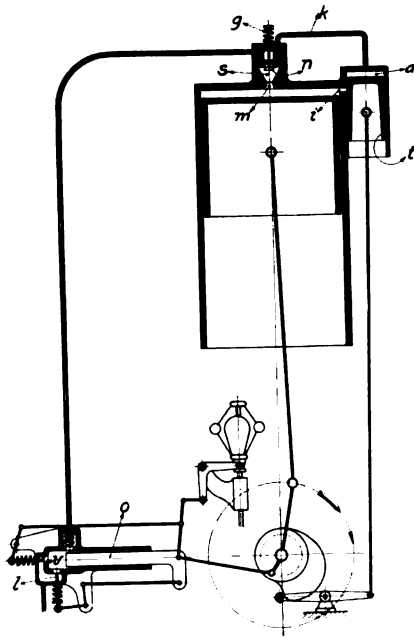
SETZ OIL ENGINE WITH AUXILIARY INJECTION AIR PISTON
